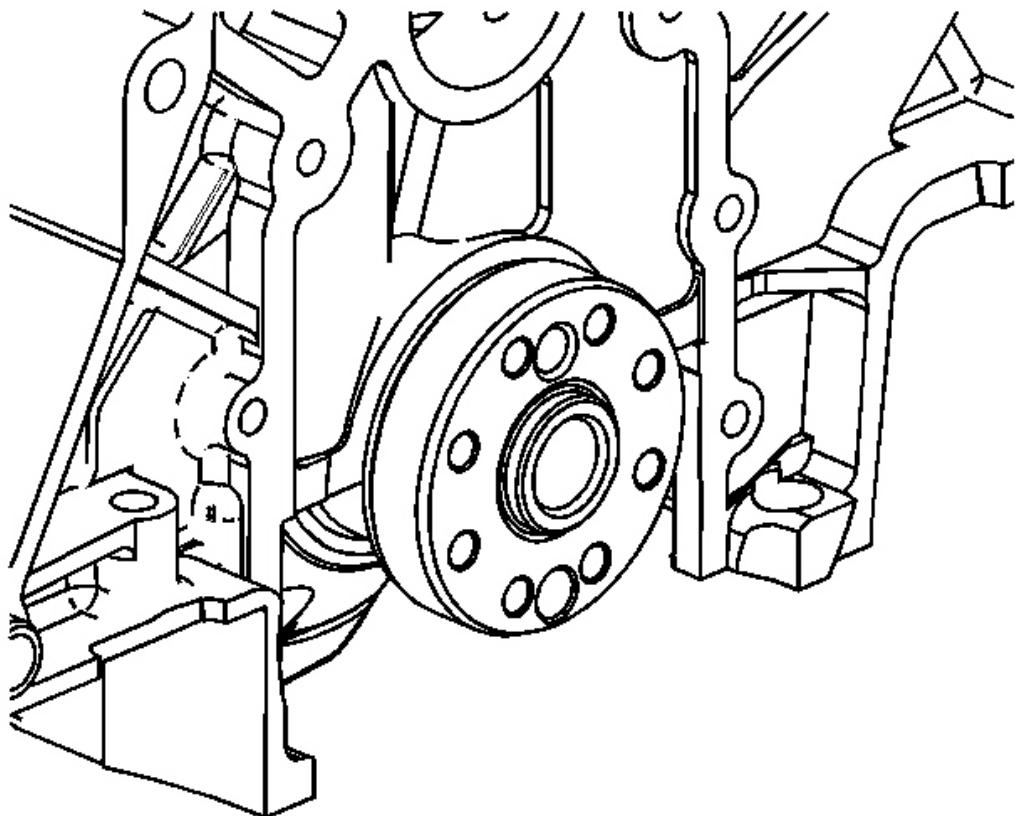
Installing Crankshaft Rear Oil Seal
